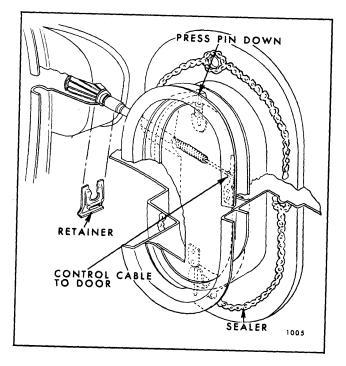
Shroud Side Finishing Panel and Air Outlet - "Z-37" Styles
